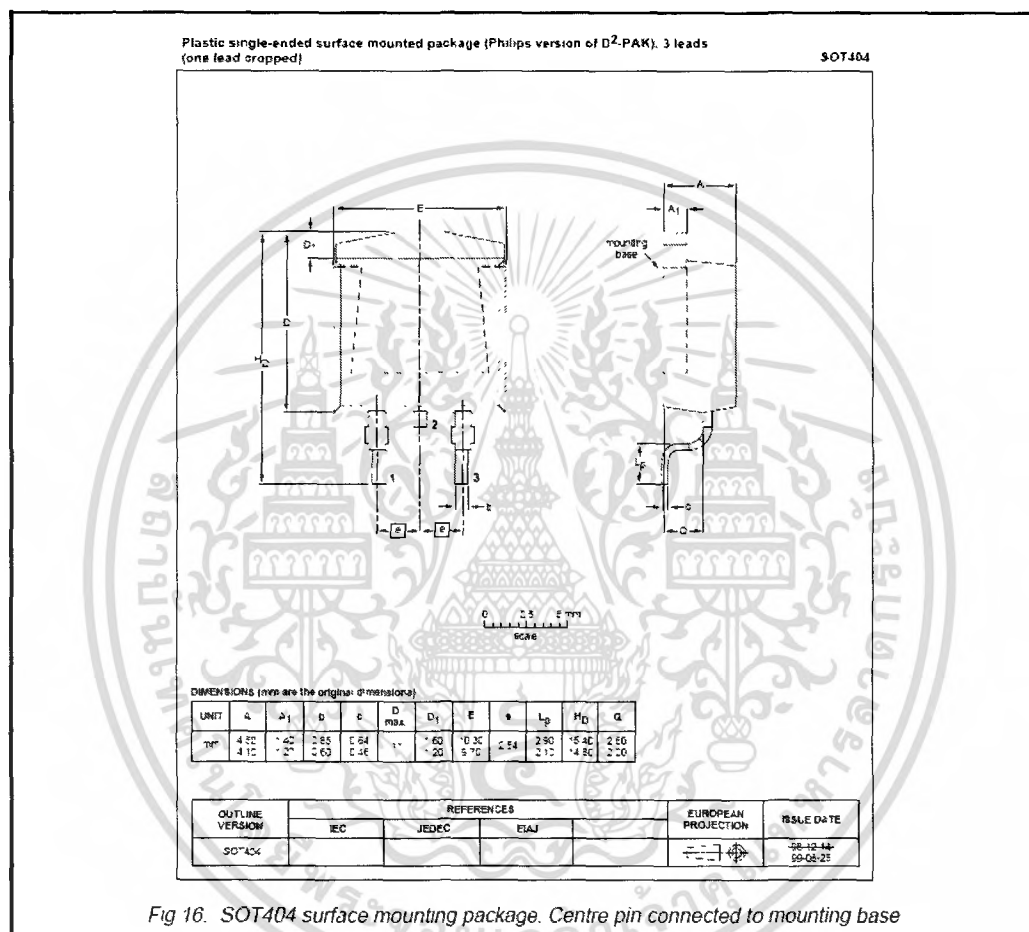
SOT104 surface mounting package. Centre pin connected to mounting base
